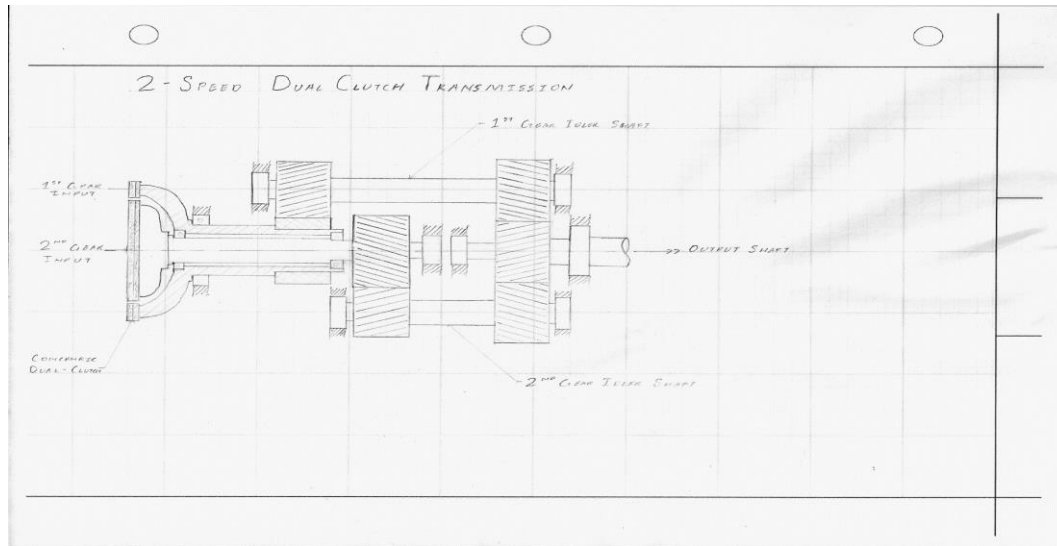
Dual-clutch layout for a two-speed transmission. This figure has exaggerated spacing between components for clarity. Key features of this system are the dual idler shafts and the concentric dual clutch.
